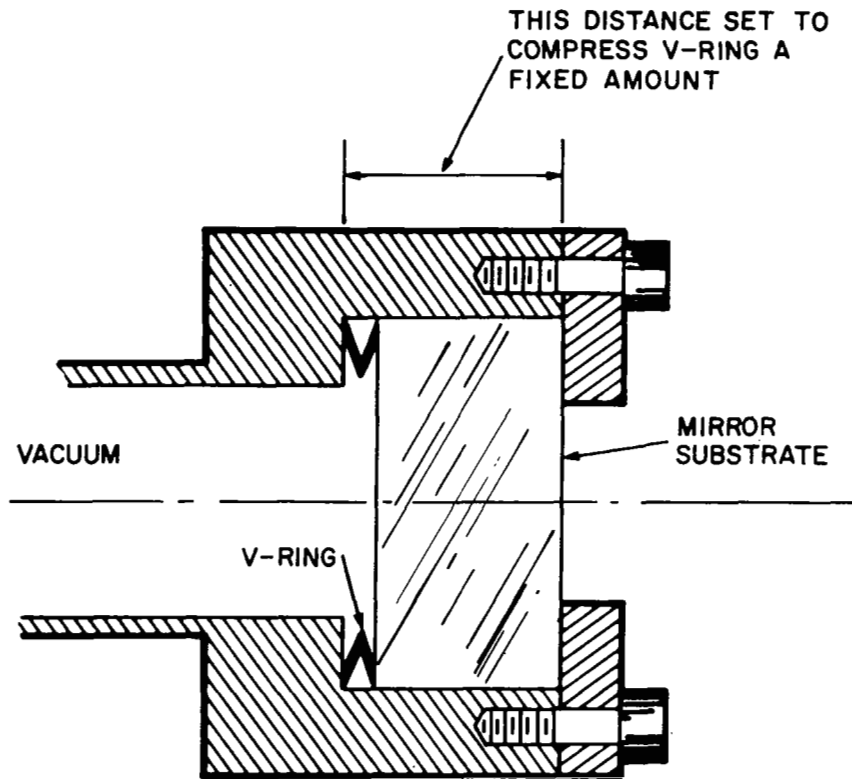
Cross sectional view of alternative mirror sealing technique using a compressed metal V-ring.
